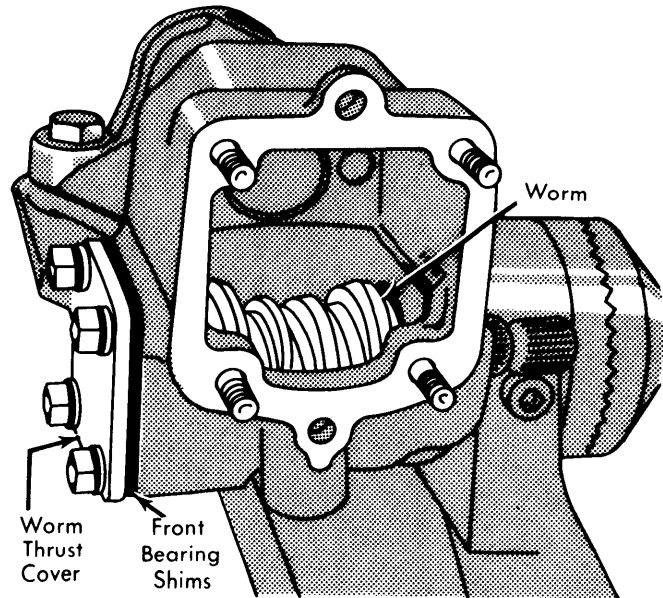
View Showing Installation of Worm Thrust Cover & Location of Adjusting Shims
